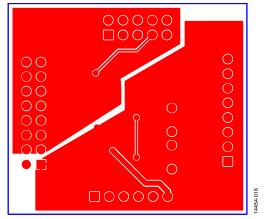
EVAL-AD5324DBZ Daughter Board Bottom Side Routing
